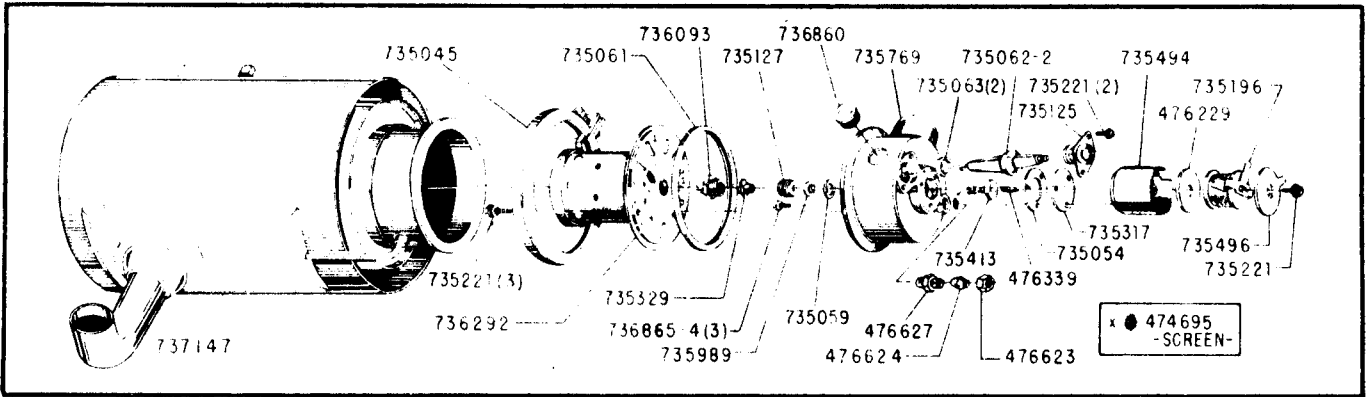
BURNER & EXCHANGER ASSEMBLY 737142-1
